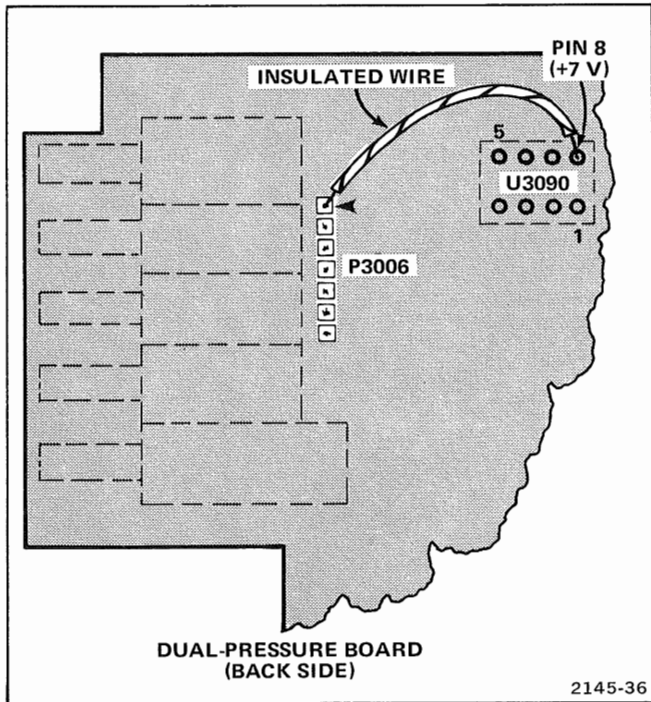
Adding wire to 414FA Dual-Pressure Board.
